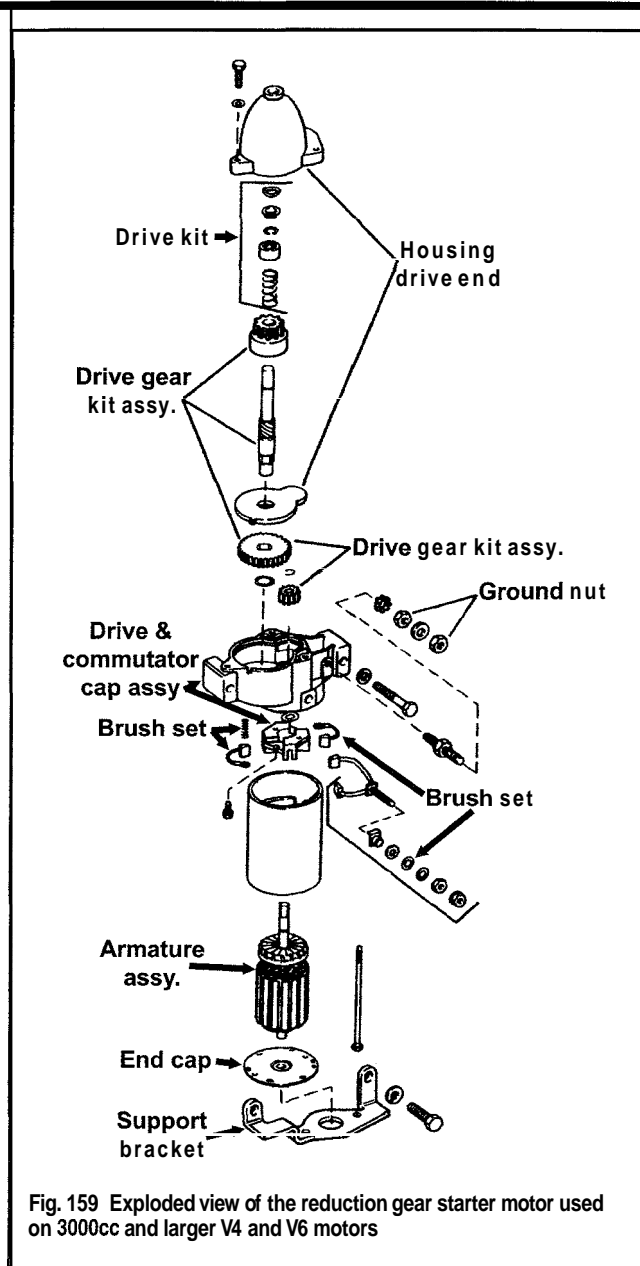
Exploded view of the reduction gear starter motor used on 3000cc and larger V4 and V6 motors
